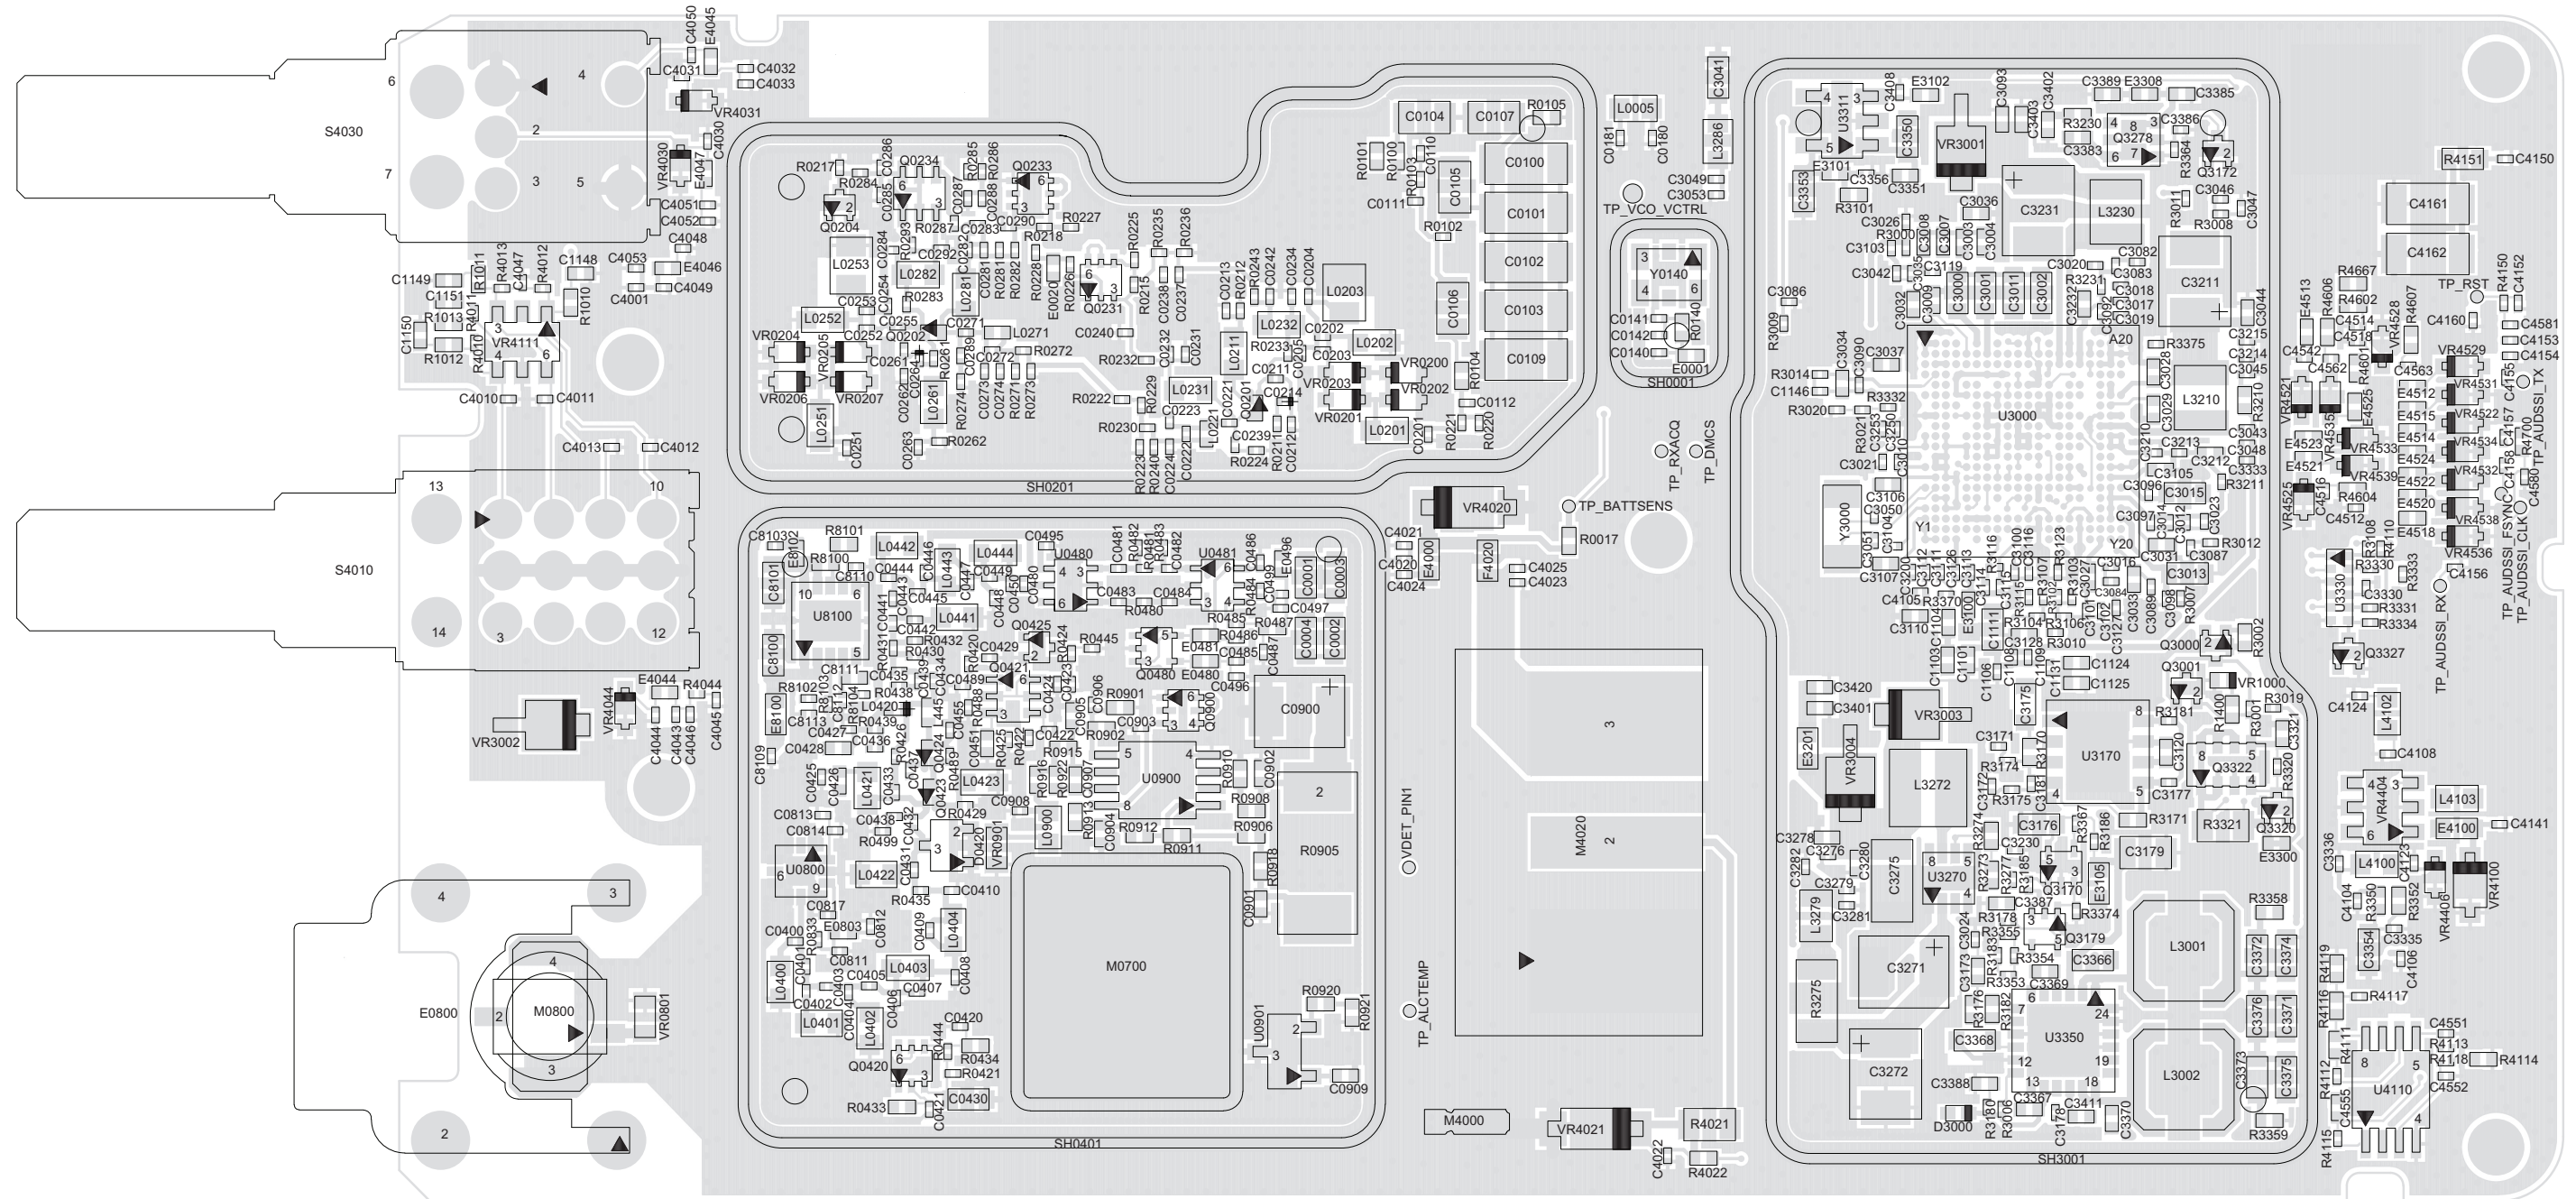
Main Board VHF Bottom Side PCB No. PC000975A01\_AA
